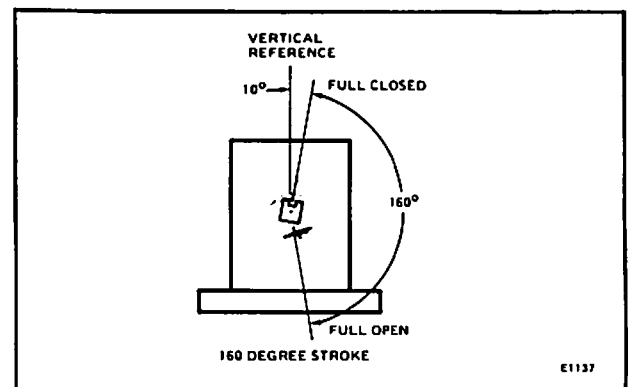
LIMITS OF MOTOR SHAFT ROTATION VIEWED FROM POWER END.
